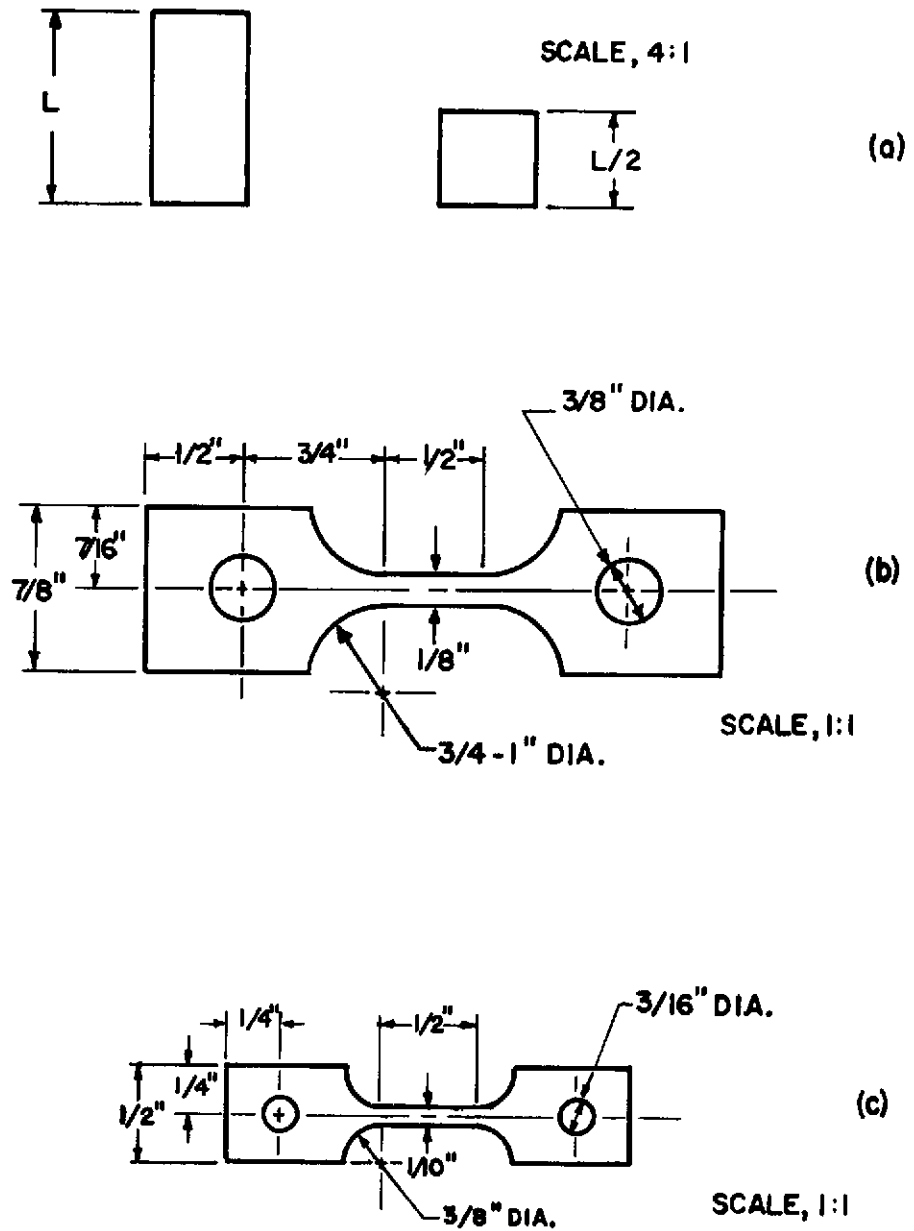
a) Compression specimen design; b) Tensile specimen design; c) Compact creep specimen for single crystal TD-NiCr.
